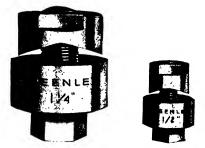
Knockout Punches and Container Courtesy of Greenlee Tool Company, Rockford, Illinois
